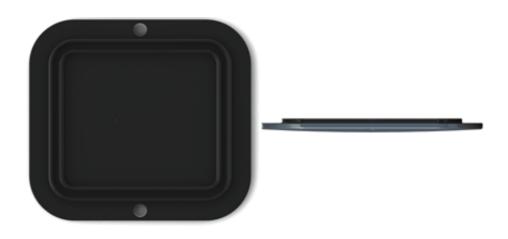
Lid design of concept A1 which is mounted with screws and O-ring.
